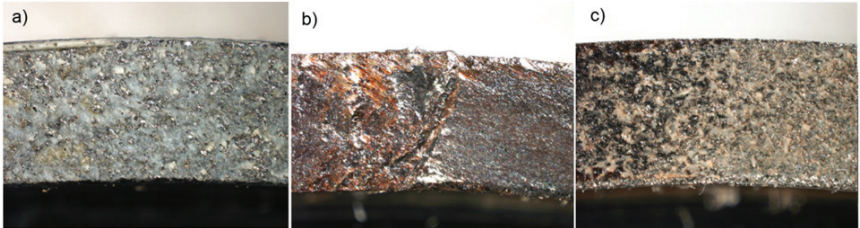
Selected optical microscope photographs of grit blasted interfaces after fatigue testing: a) bonded $q = 50$ MPa specimen with shear decohesion failure, b) bonded $q = 150$ MPa specimen with fretting fatigue failure and crack in the HSS substrate and c) bonded $q = 50$ MPa specimen after a run-out test (followed by static fracture test).
